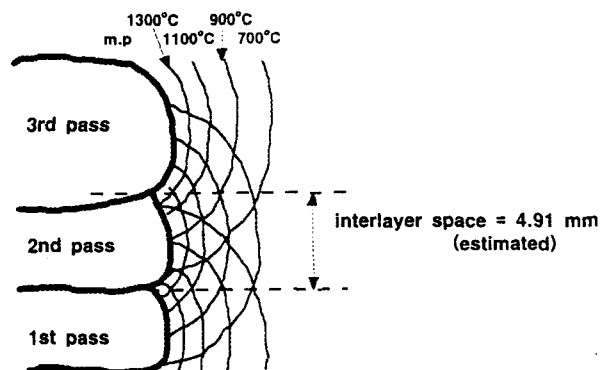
Schematic illustration of HAZ isothermals in a multipass weld
